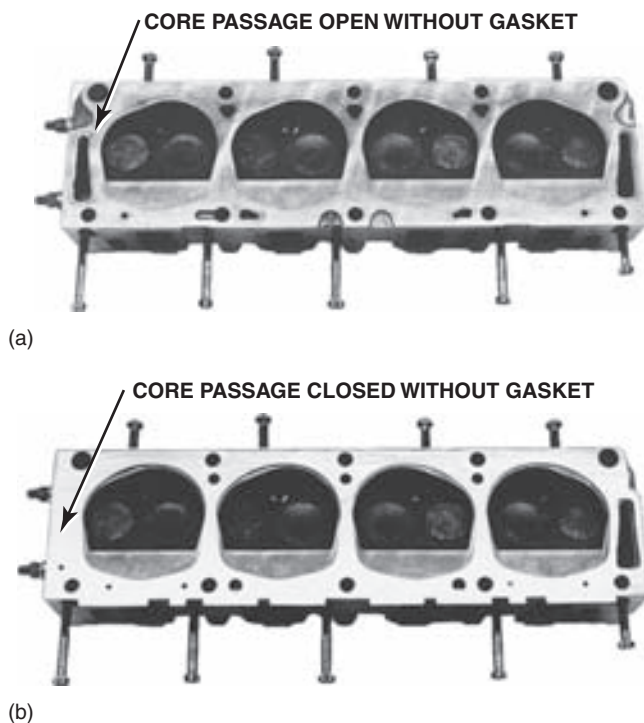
Coolant flow control. (a) Head core passages open without a gasket. (b) Gasket covering the left-hand core passage opening.
